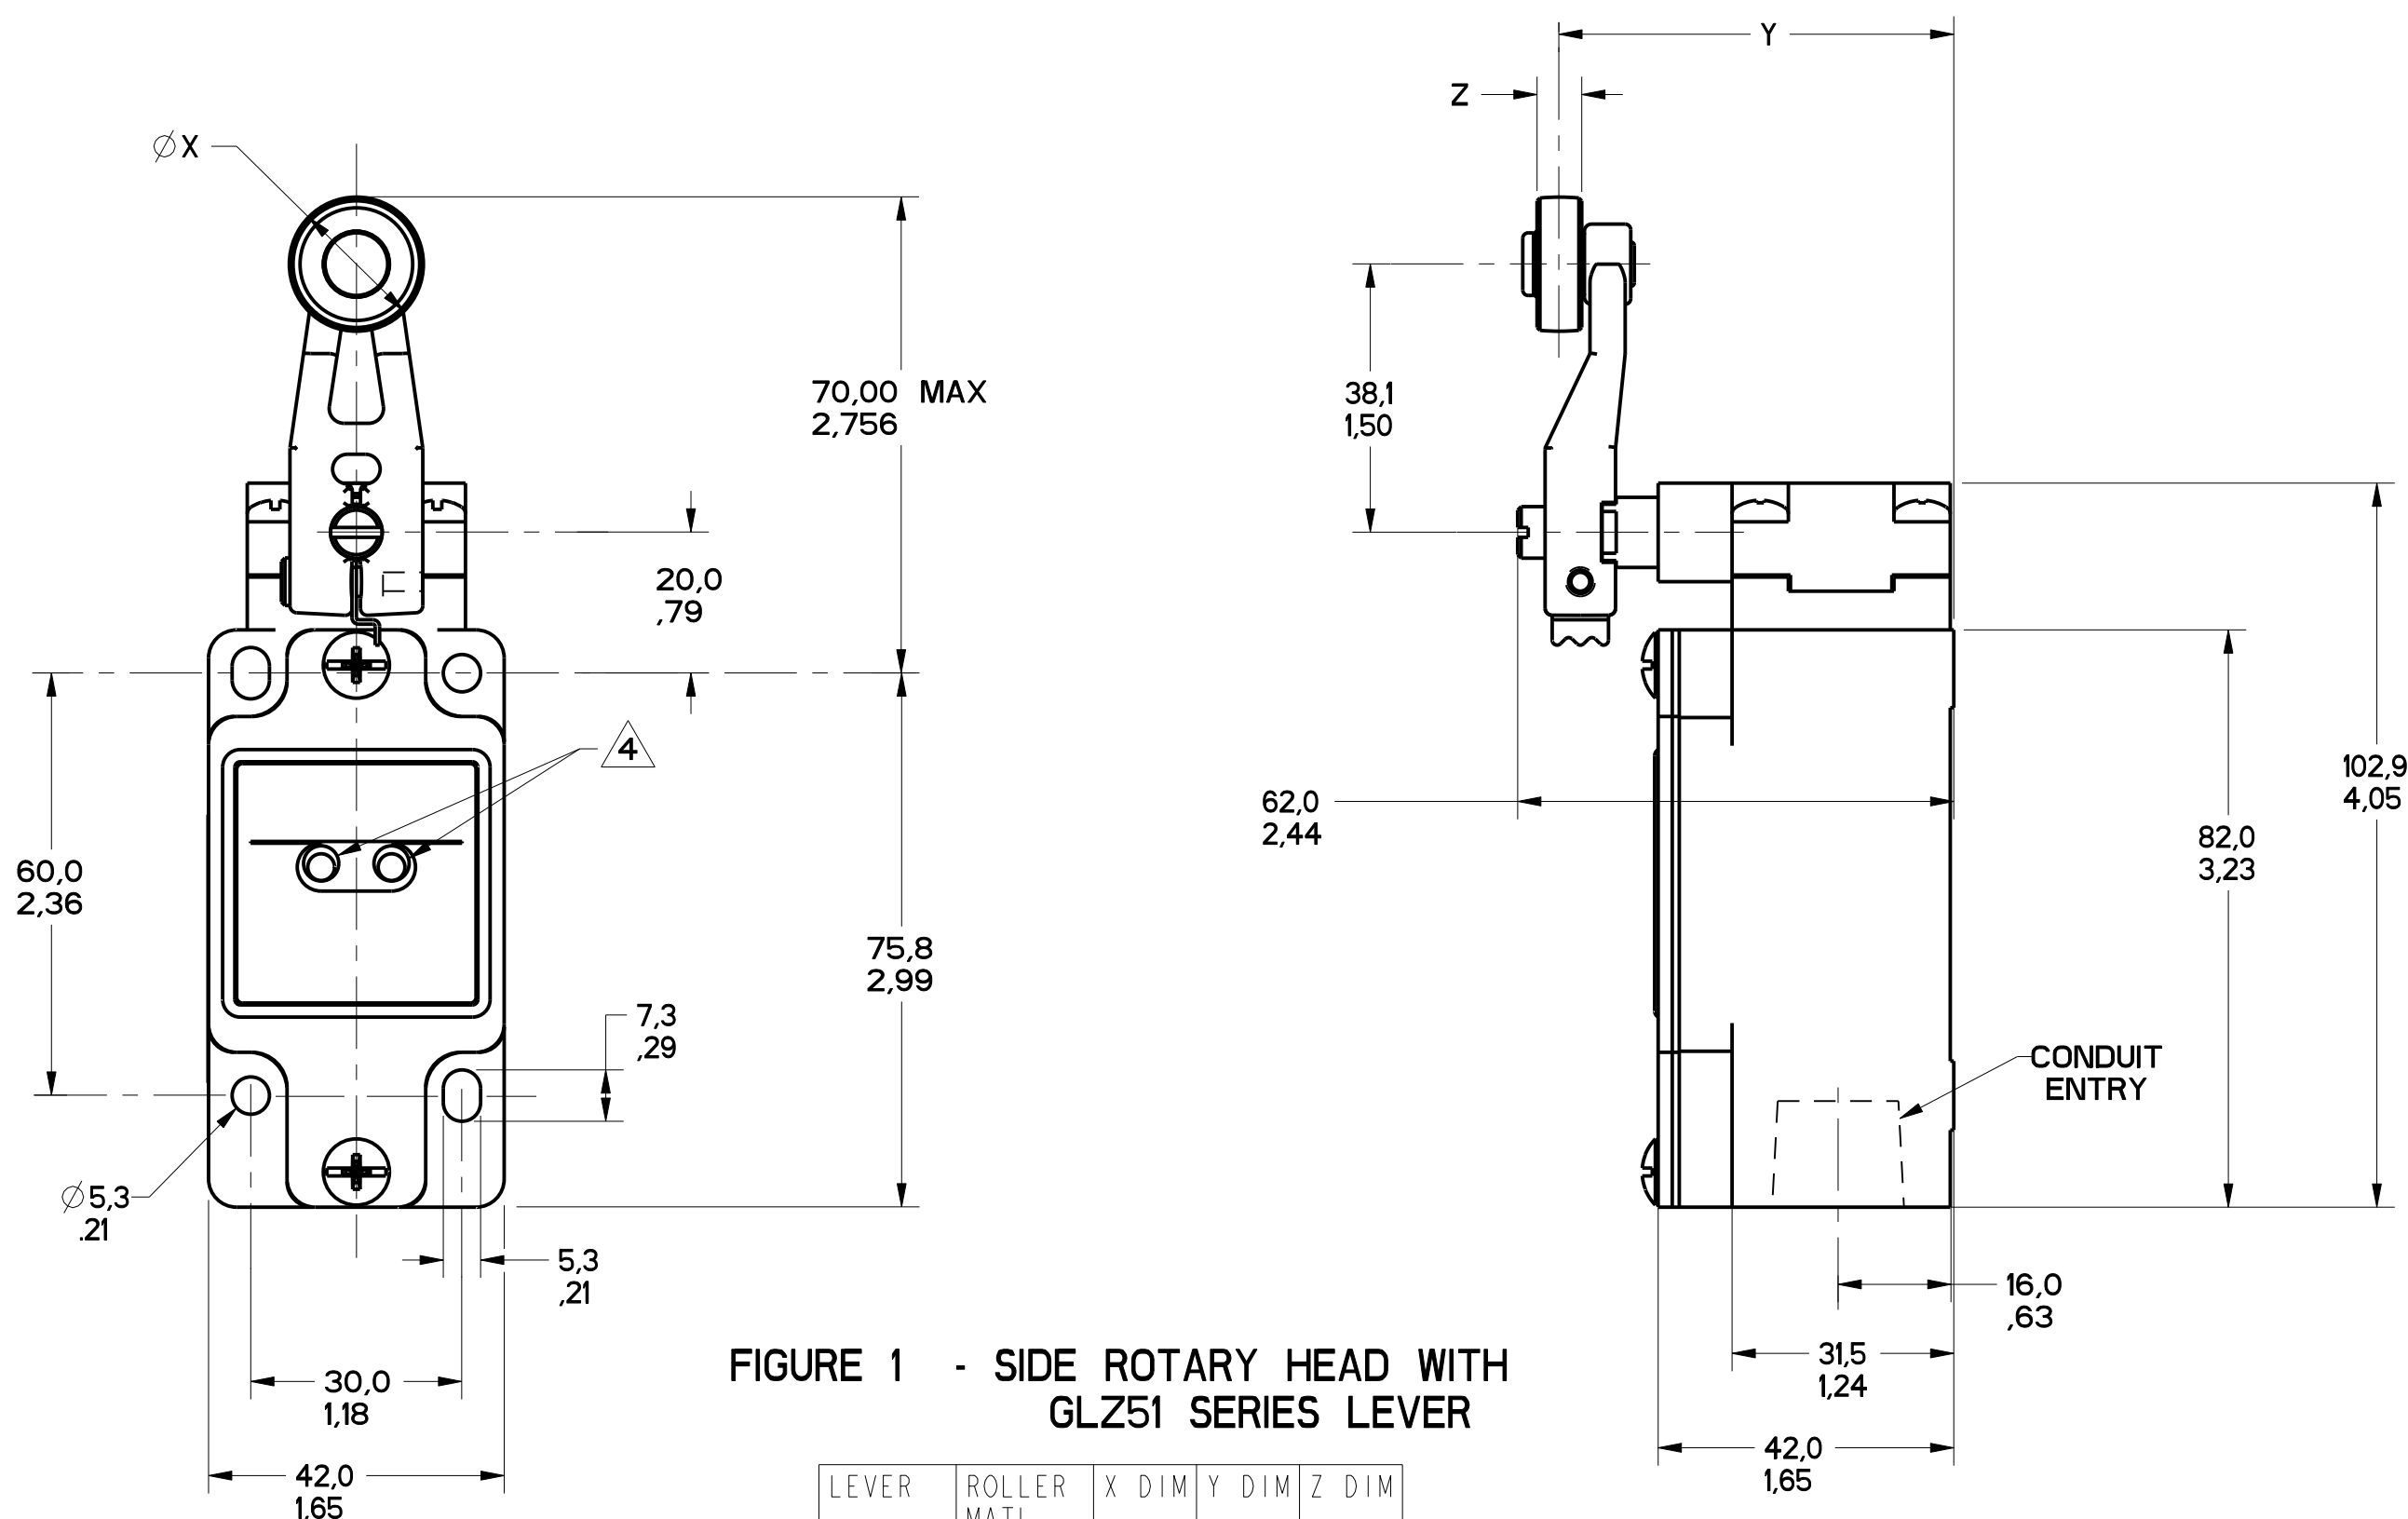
SIDE ROTARY HEAD WITH GLZ51 SERIES LEVER
